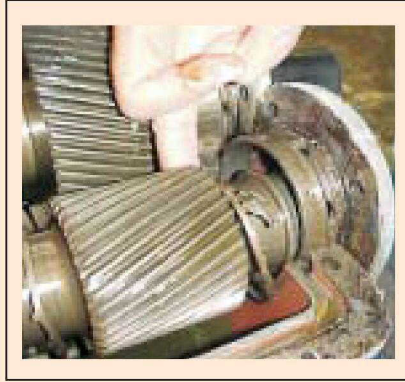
Detail of rolling bearing broken cage used in gearbox because of inadequate lubrication.
